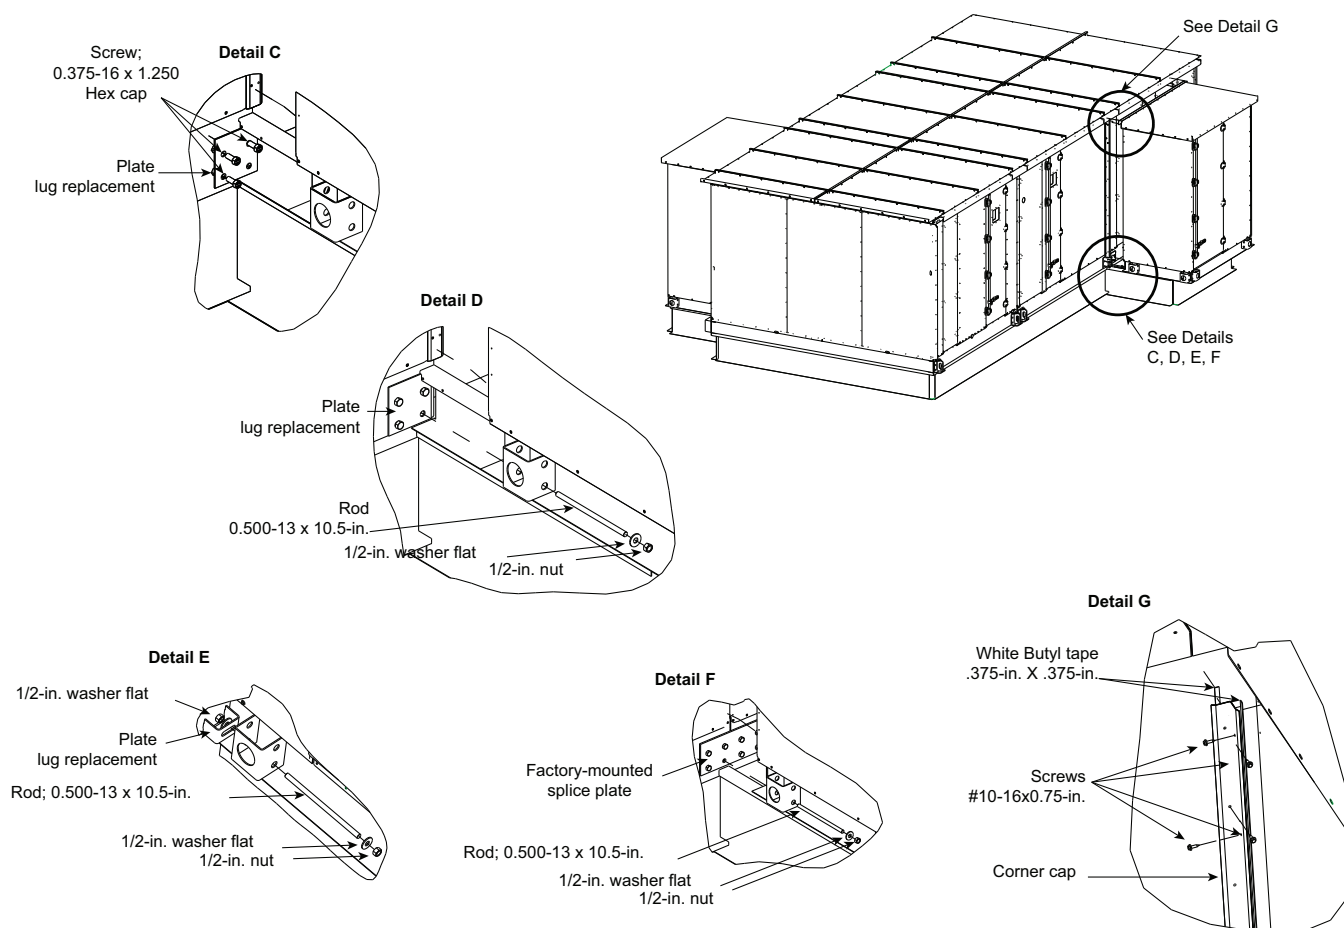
Pipe cabinet installation (internal width 102 to 168 in.)
